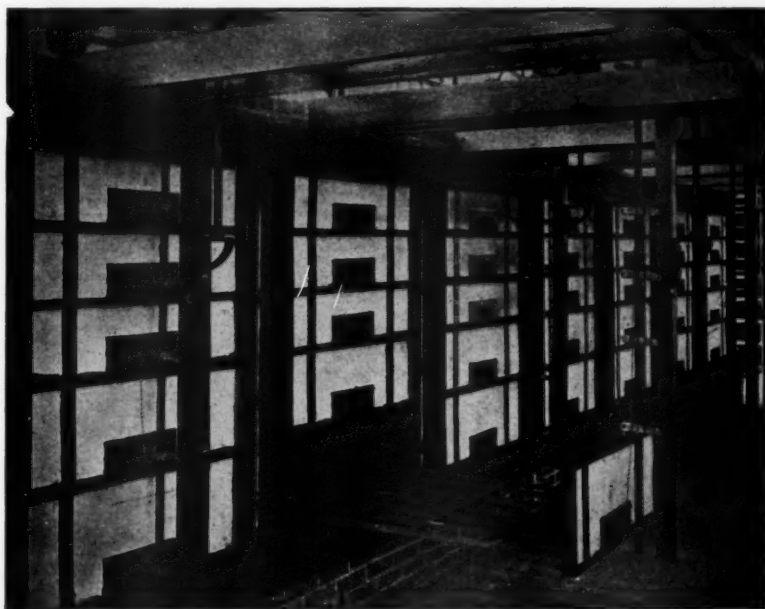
DRAWER TYPE OF CORE OVEN.
